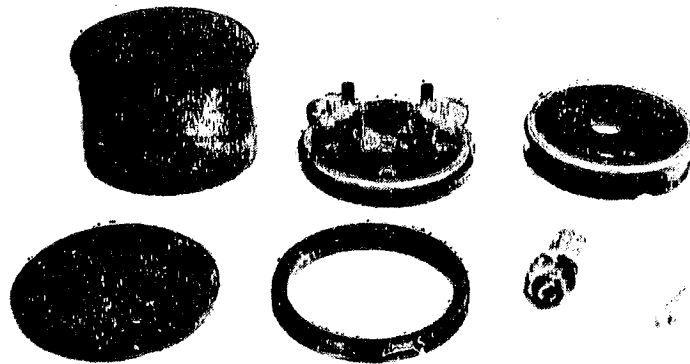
Preassembly parts of the final embodiment to create continuous roll. The lower right corner shows the 21 lead slipring.
